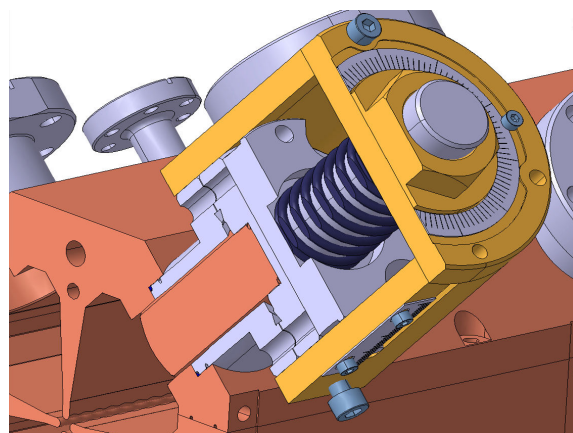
Tuner tooling for precise adjustment for tuning and final assembly after cutting.
